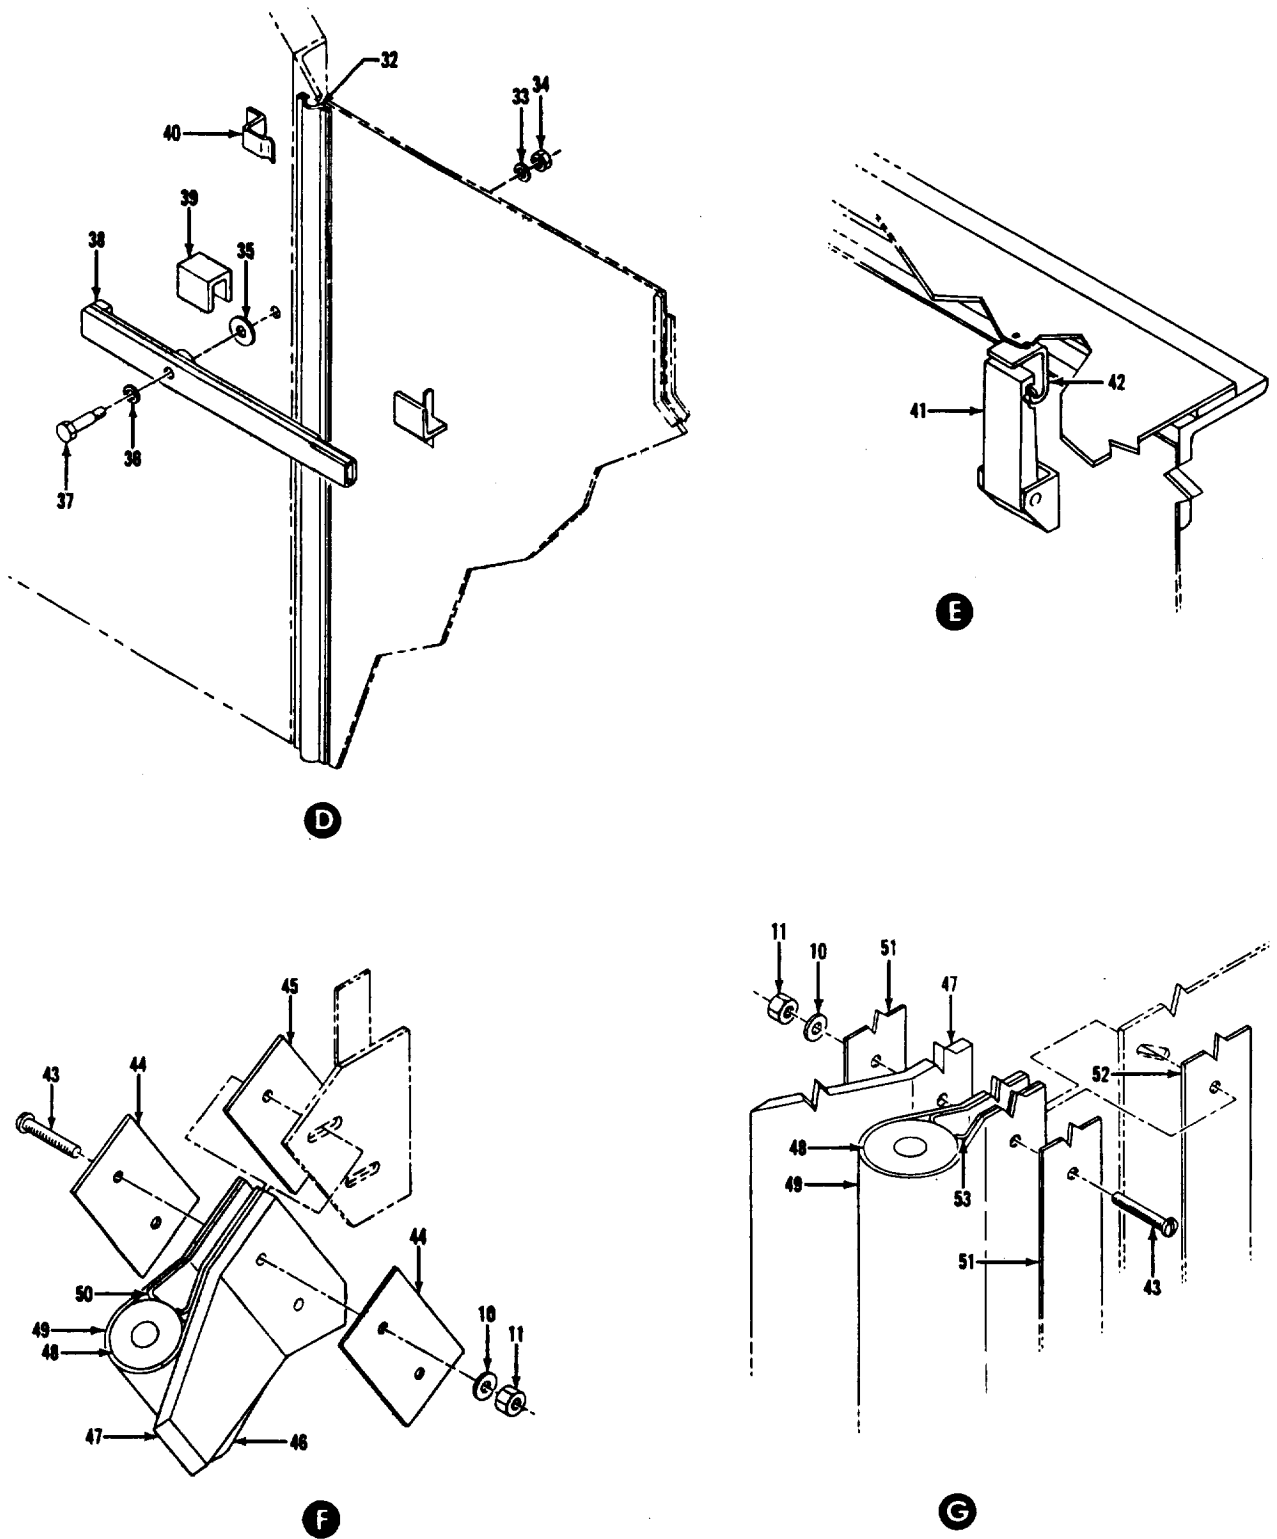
Hood Adapter Assembly (Sheet 3 of 6)
